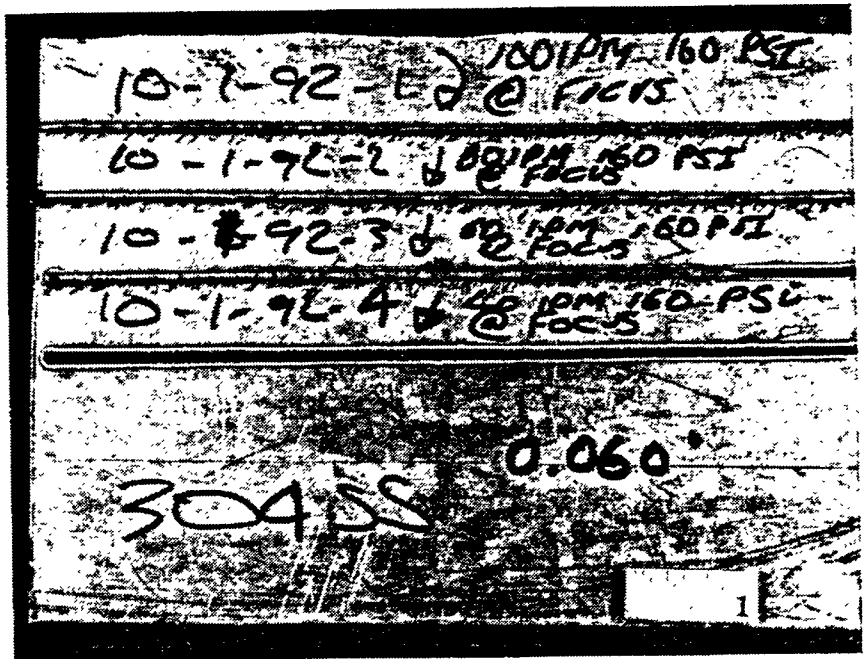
304SS 0.06 in. Thick Samples 10-1-92-1, 2, 3
